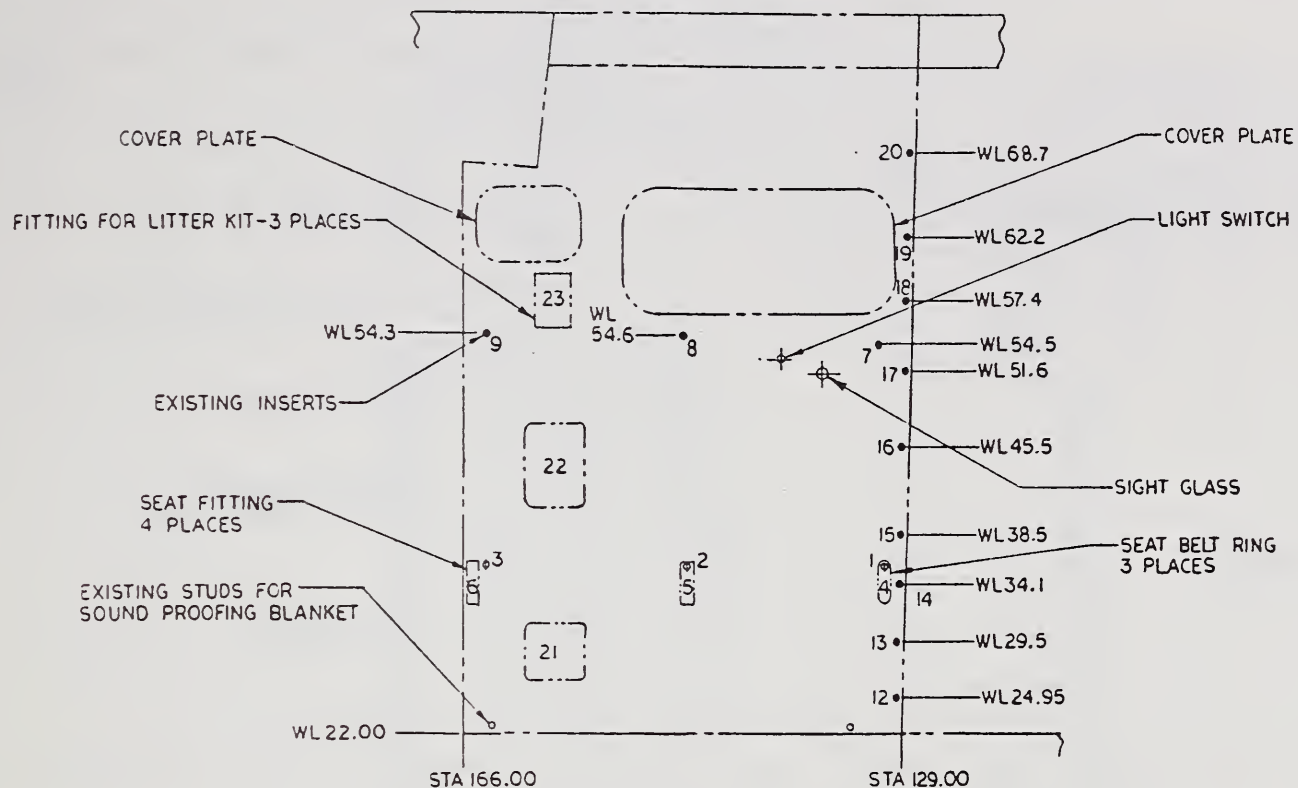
Bell 214B B.L. 14 righthand wall fittings.
